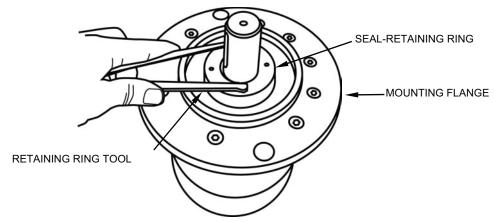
Installing Seal-Retaining Ring into Mounting Flange.
